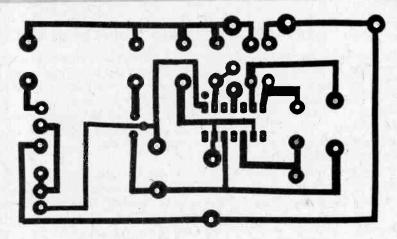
Actual-size etching and drilling guide at right. Parts placement guide above.
